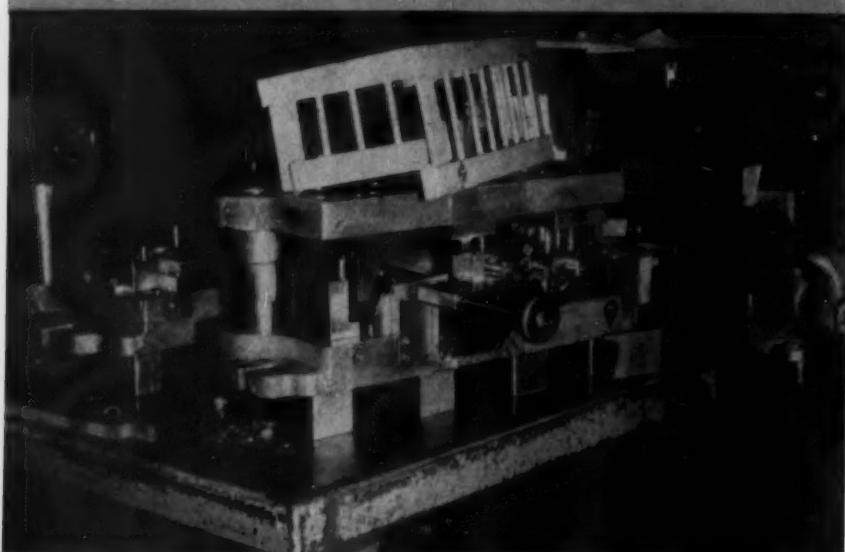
This illustration shows a die in the repair crib and the guard shown is for this particular die—further proof that the safety guard always remains with its intended die.
